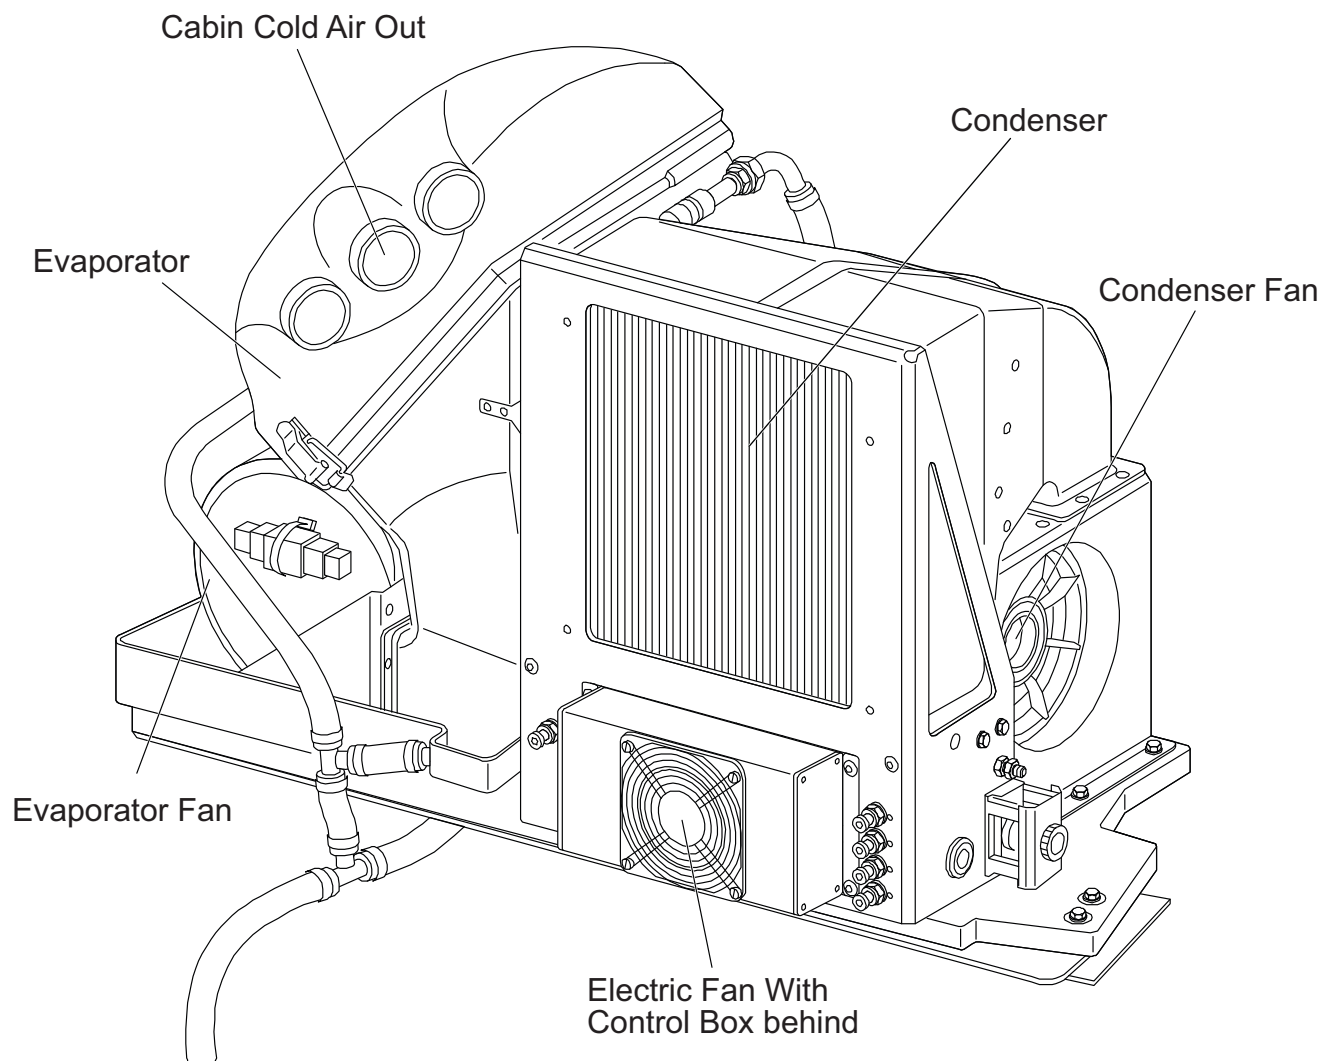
Central Unit - Front and LH Side (if OÄM 62-005 is installed)
